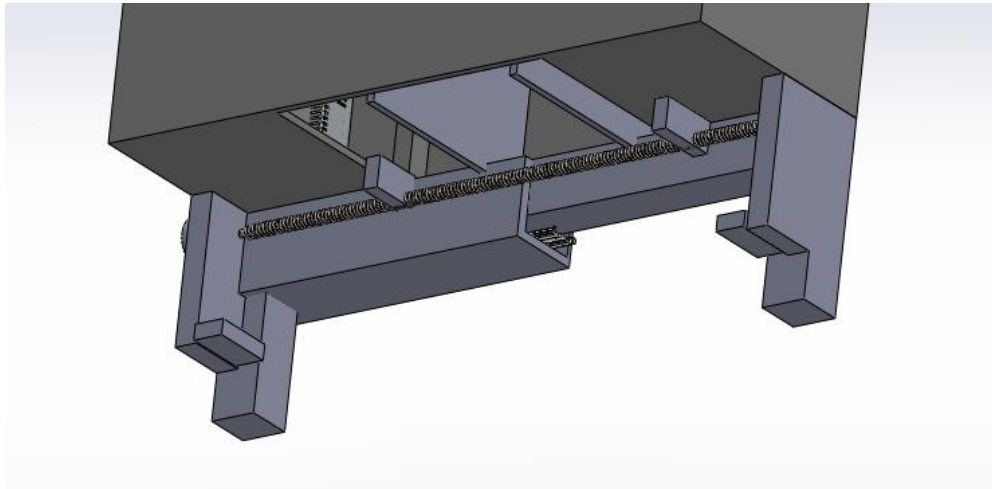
Bottom View and Attachment Piece of Sort-e
